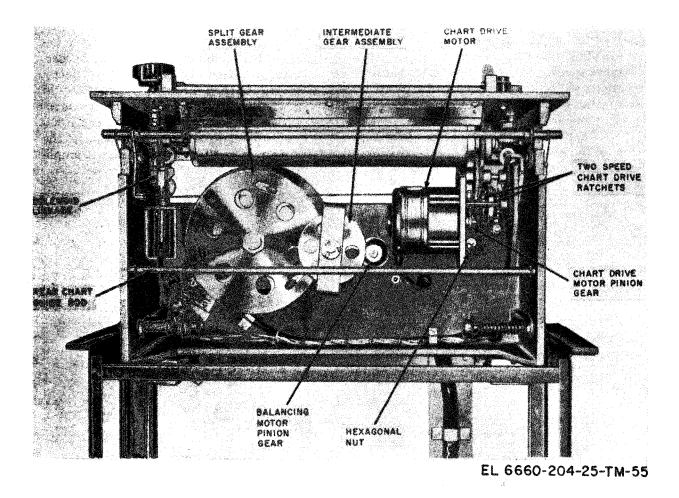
Frequency-Time Recorder, Bottom View Showing Main Chart Drive Components.
